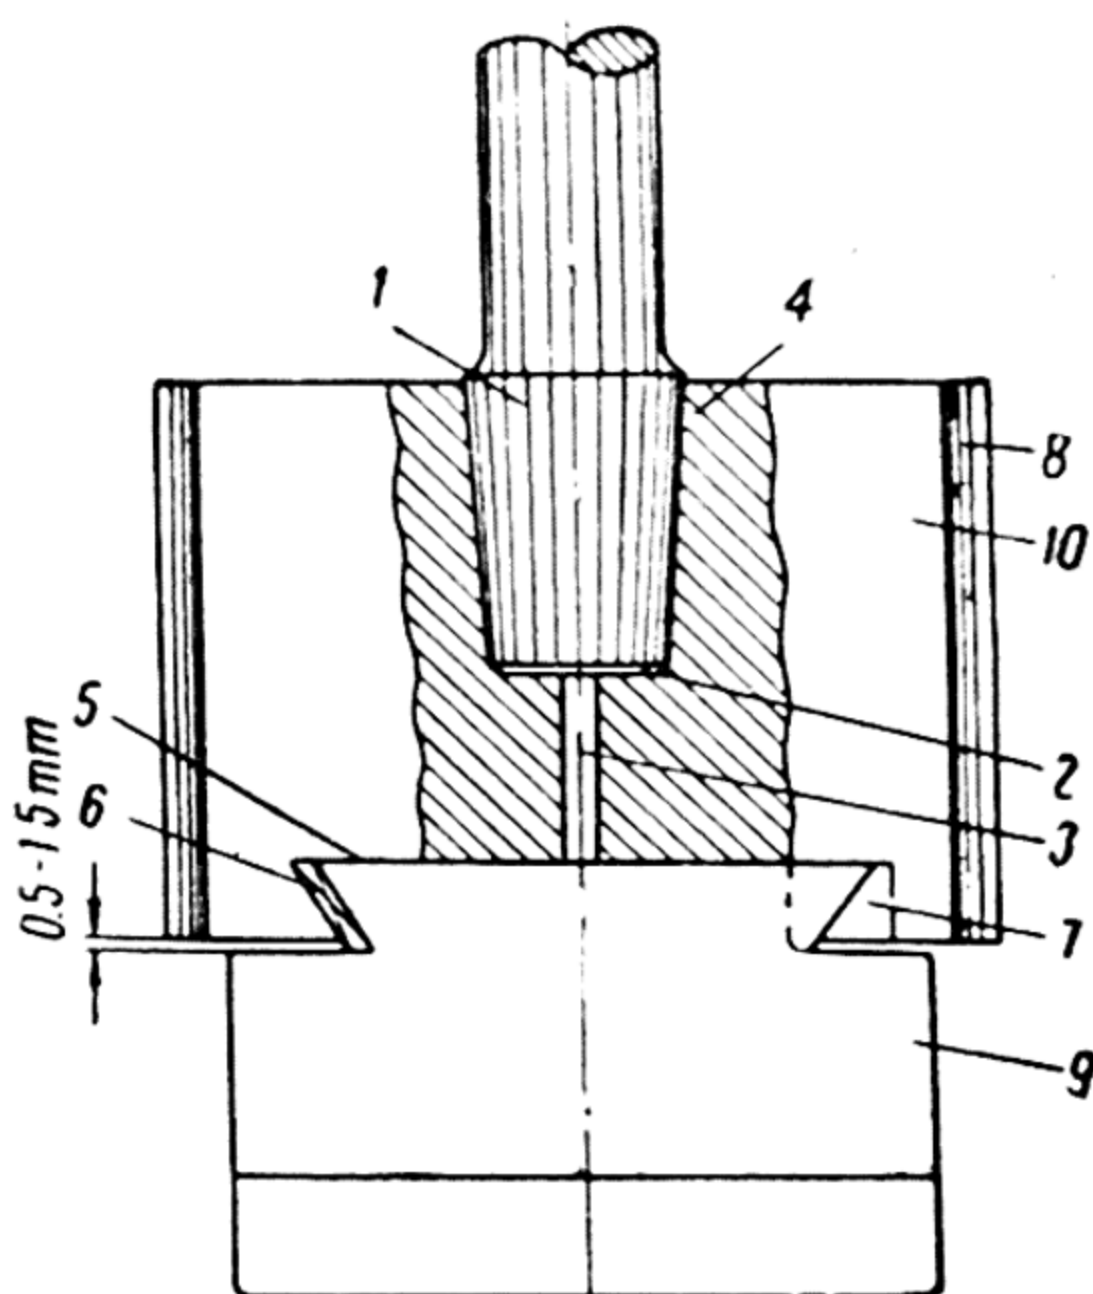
Rigid attachment of ram to piston rod and attachment of ram head to ram
